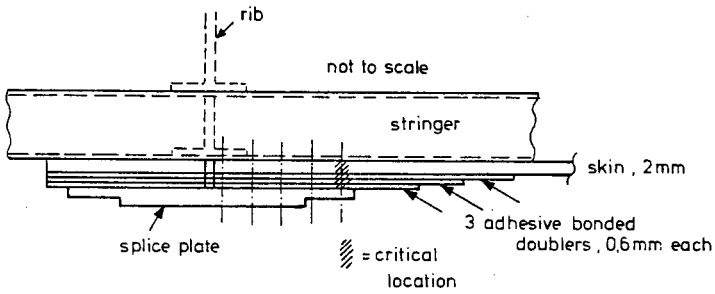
Wing joint with adhesive bonded doublers on skin (Ref. 9).
